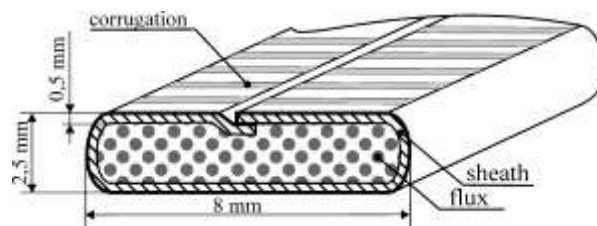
Schematic drawing of the cross-section of a FCAW wire
